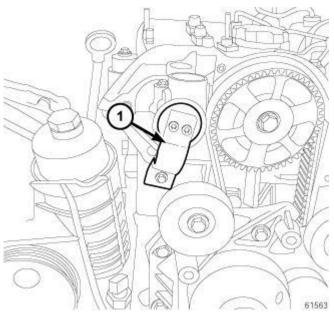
Camshaft Locking Tool Installed Courtesy of CHRYSLER LLC
